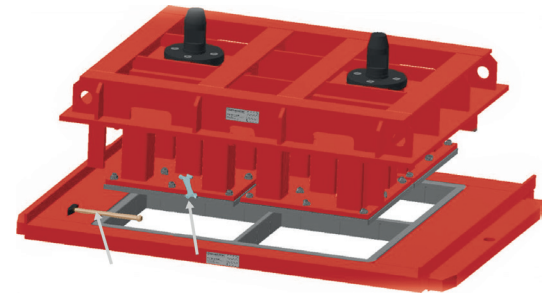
Example of the leaving of foreign material on the mold (e.g. a hammer, a key)
